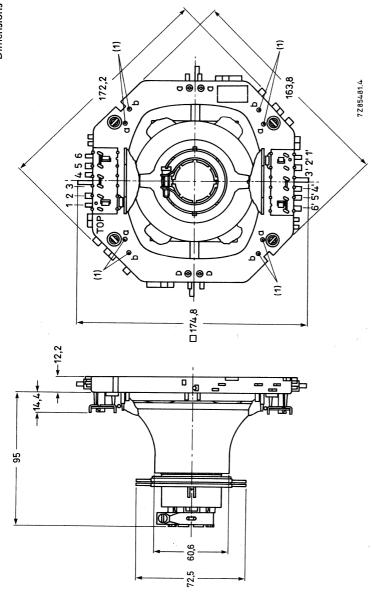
Deflection units AT1039/00 and AT1039/01.
